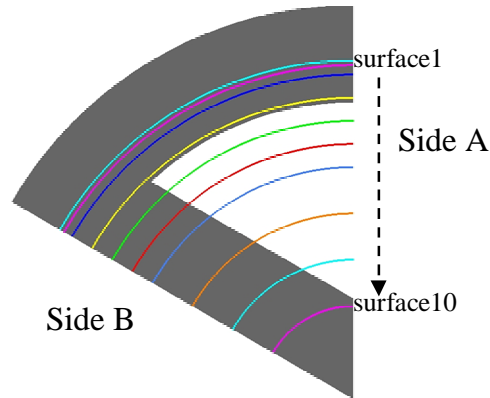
Positions of ten cylindrical surfaces inside the billet
